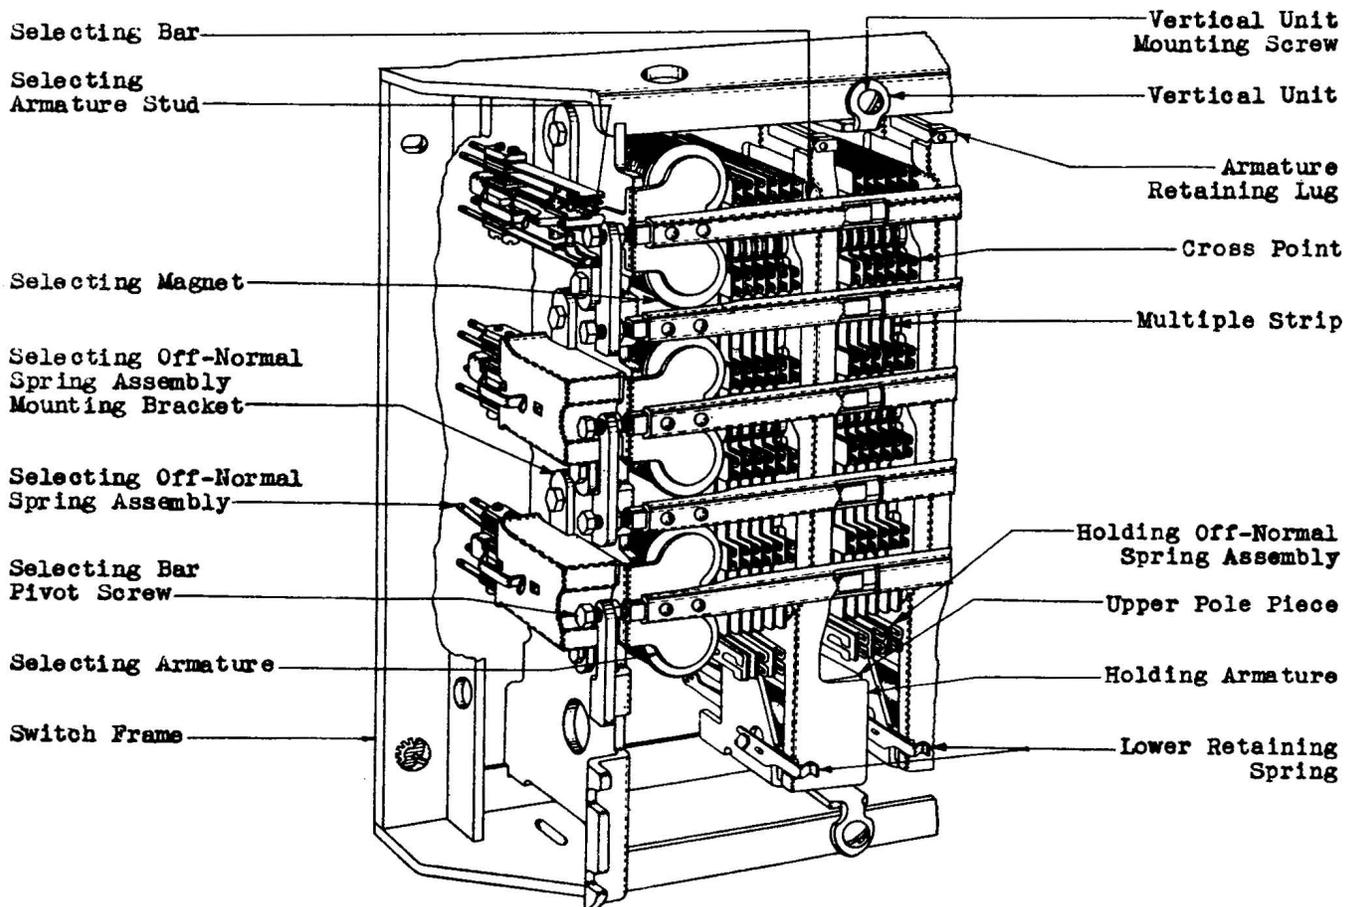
Fig. B - General View of Switch Equipped with Vertical Units Having Lower Retaining Spring Only
